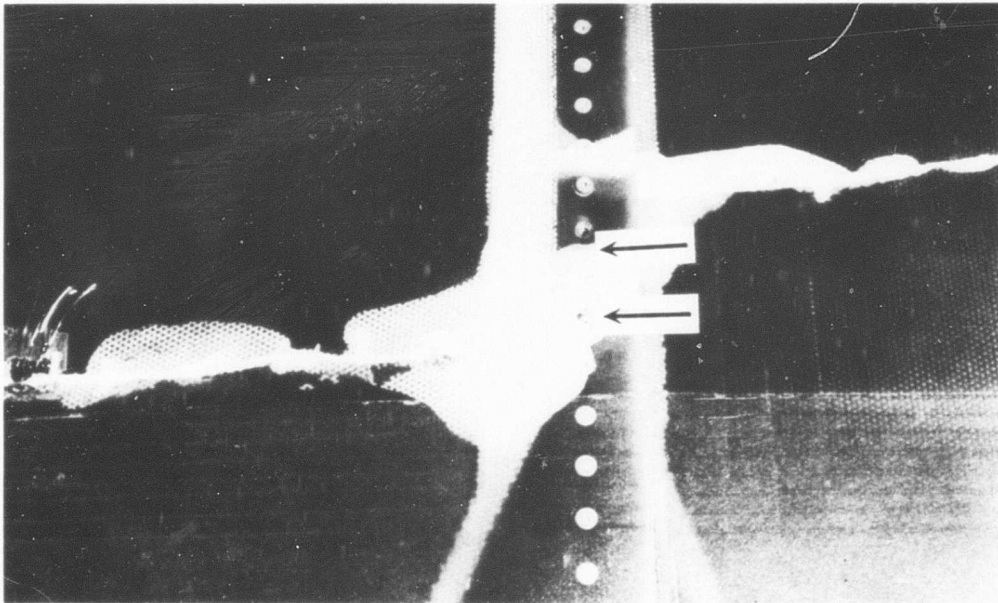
No. 1 FRP Wing Section - Failure of the Upper Surface Panel in the Joint Area.
